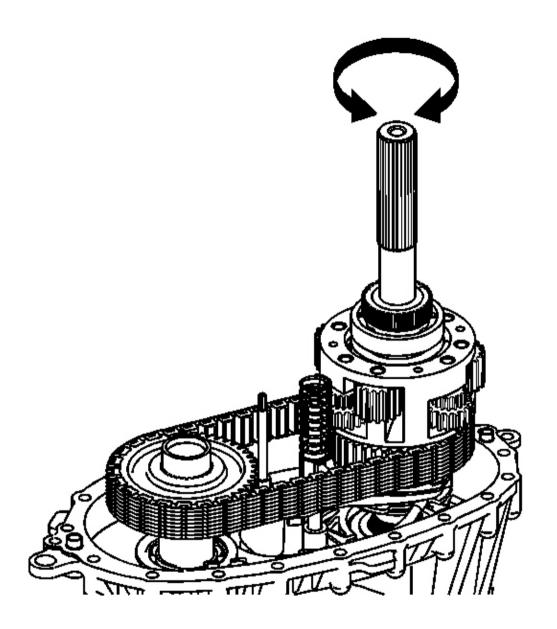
Rotating Rear Output Shaft Courtesy of GENERAL MOTORS CORP.
